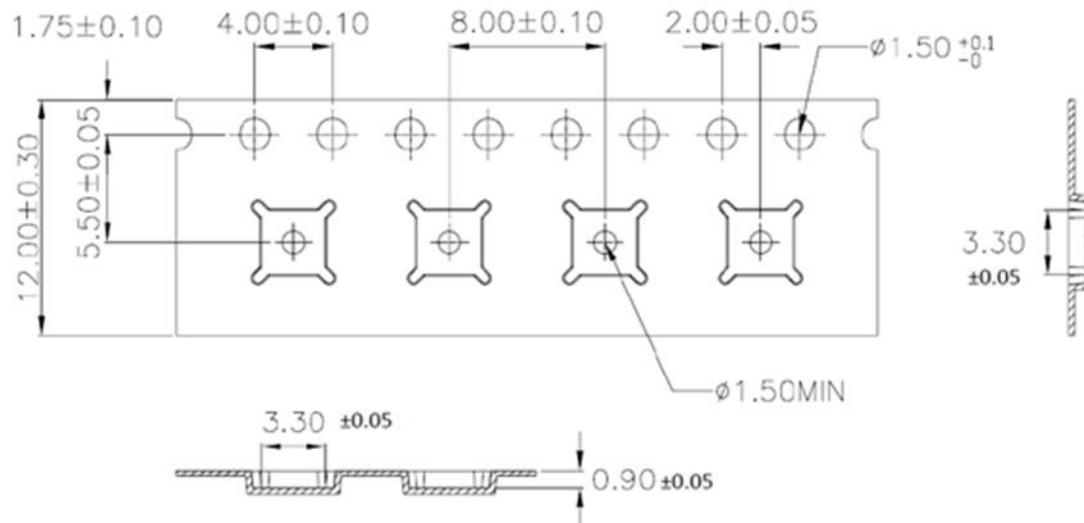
2.5 x 3 mm² Tape Dimensions (TYPE I)
